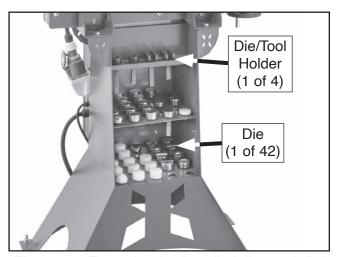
Example of uninstalled dies and die/ tool holders stored in storage holes.
